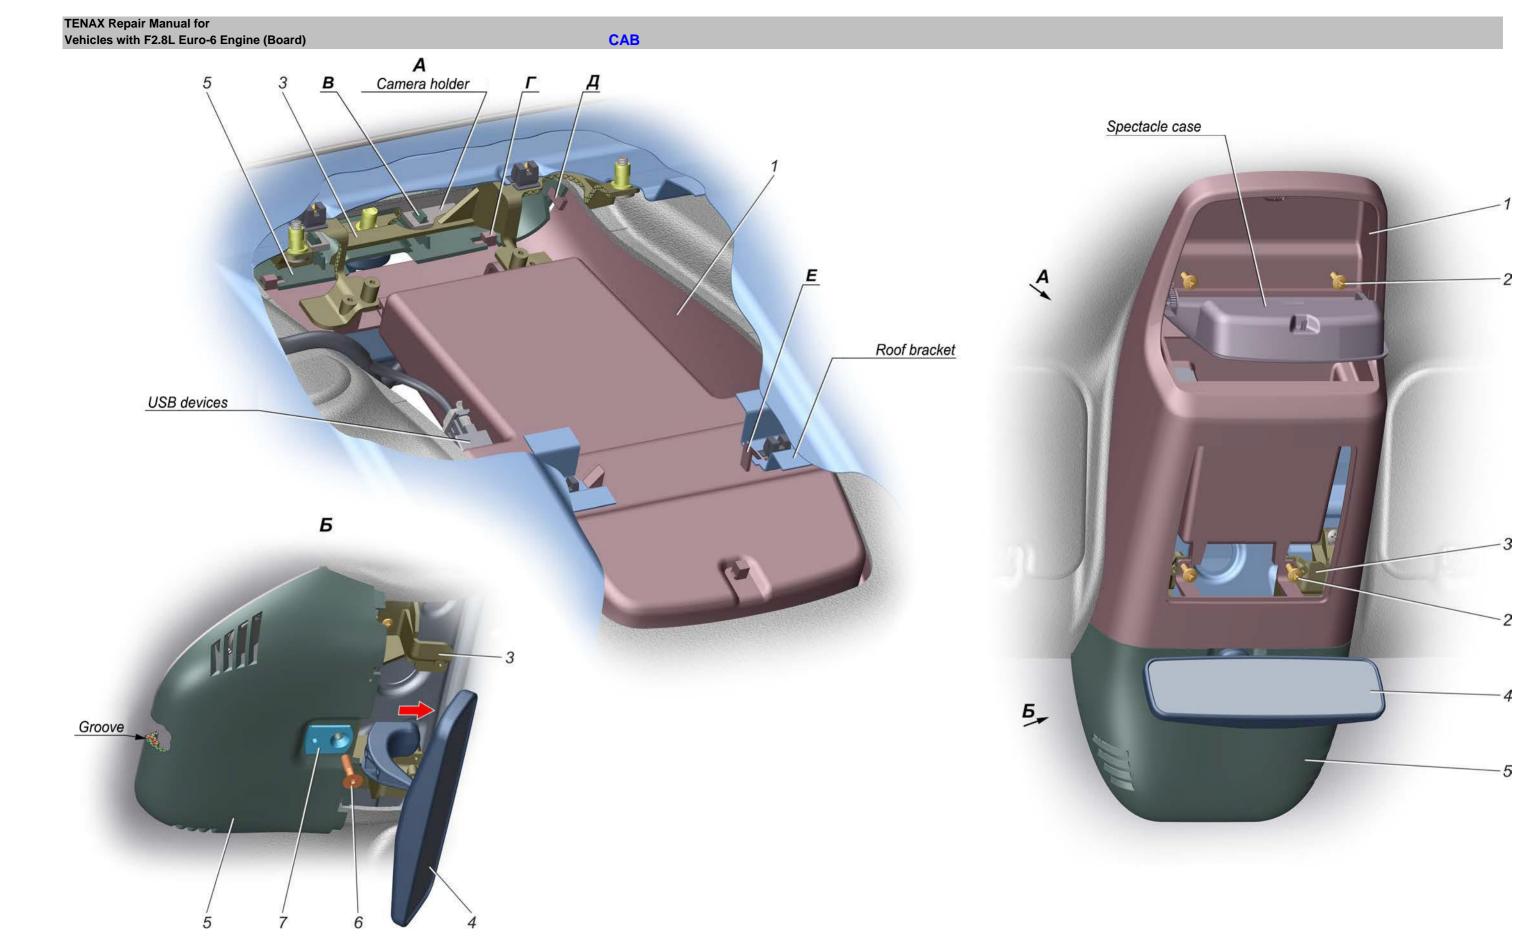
Console and camera holder cover installation: 1 – overhead console; 2 – screws; 3 – bracket; 4 – interior rear-view mirror; 5 – camera holder cover; 6 – screw; 7 – plate
